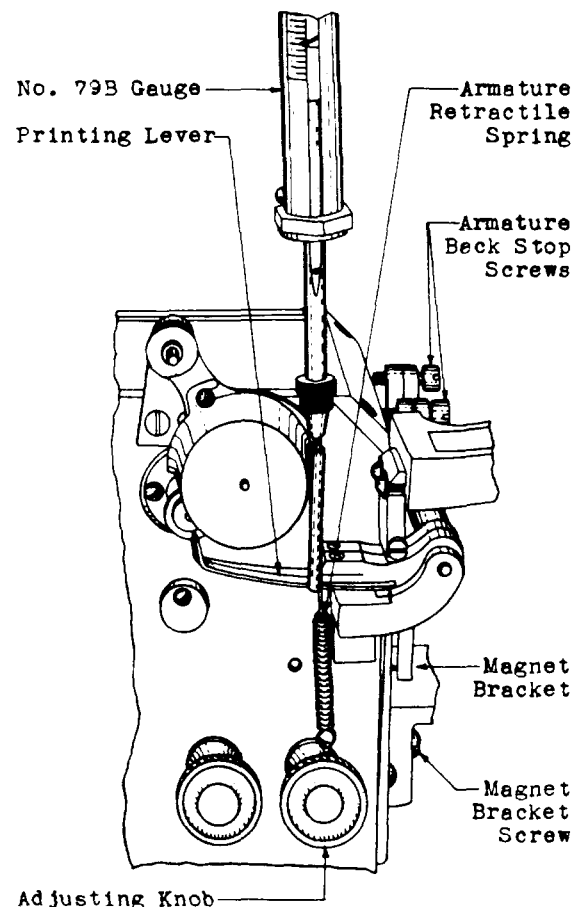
Method of Checking Printing Lever Retractable Spring Tension
